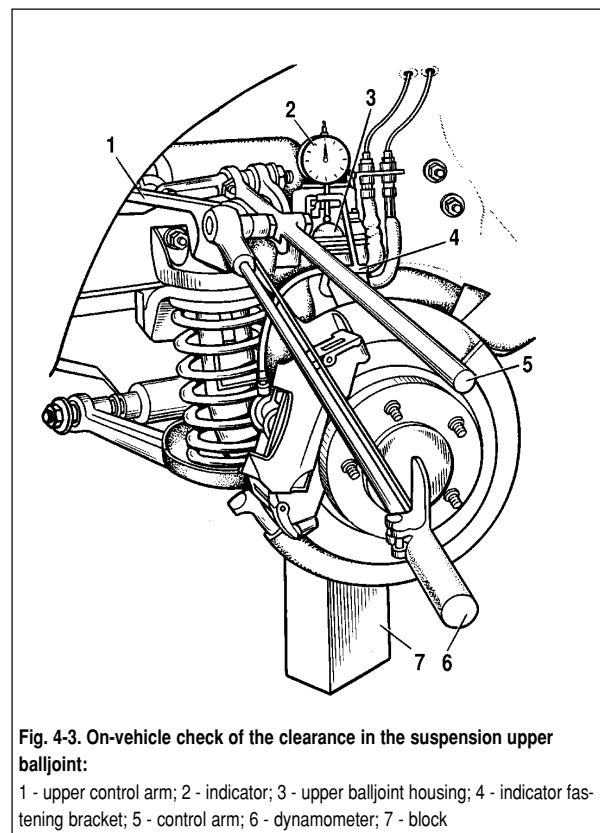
On-vehicle check of the clearance in the suspension upper balljoint:
